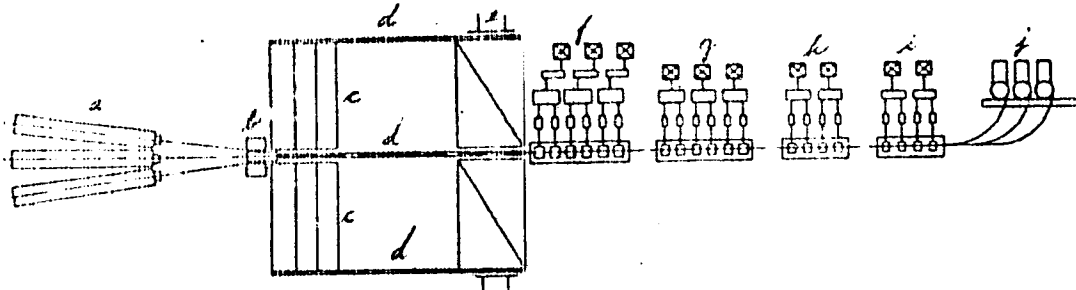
A layout of the equipment in the shop producing rolled wire of 10-20 mm diameter from 140 x 140 mm billets made by continuous casting on a conveyor-type installation: (a) three installations of continuous casting; (b) gas cutter and shears (right and left); (c) pull-off transfer; (d) roller conveyor; (e) continuous furnace with pushers; (f) reduction group; (g) roughing; (h) semifinish; (i) finishing group; (j) coilers.
